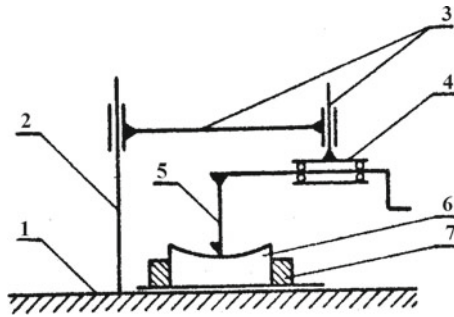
Device for cutting holes. 1—the base of the device; 2—front; 3—the links to move the cutter; 4—a device for fixing and rotating the cutter; 5—cutter; 6—sample (part); 7—a device for fixing a sample (detail)
